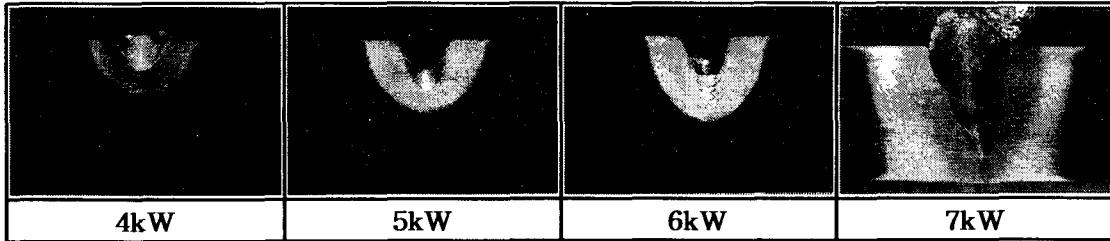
bead shape of A7N01 alloy with various laser power (welding speed: 4m/min)
